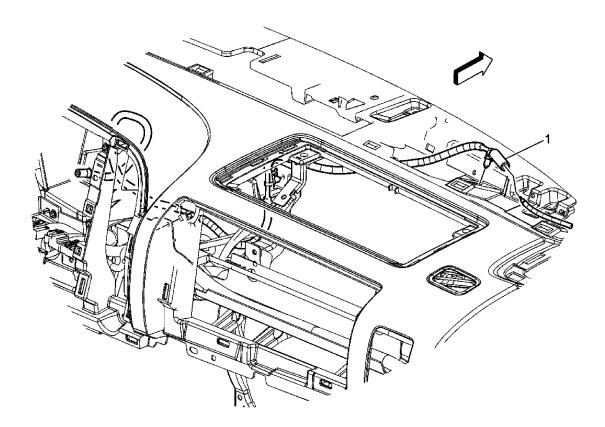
Radio Antenna Cable Extension Cable Replacement (without RPO SLT) Courtesy of GENERAL MOTORS CORP.
